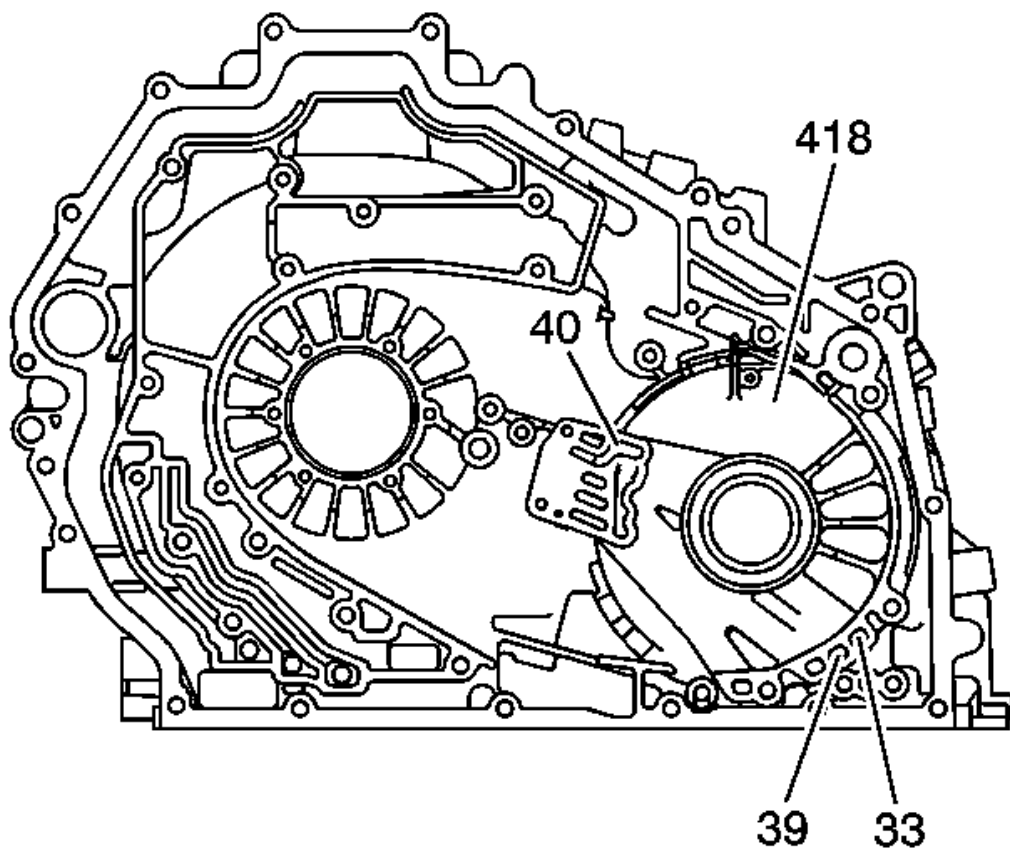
View Of Inspection Areas In Driven Sprocket Support
